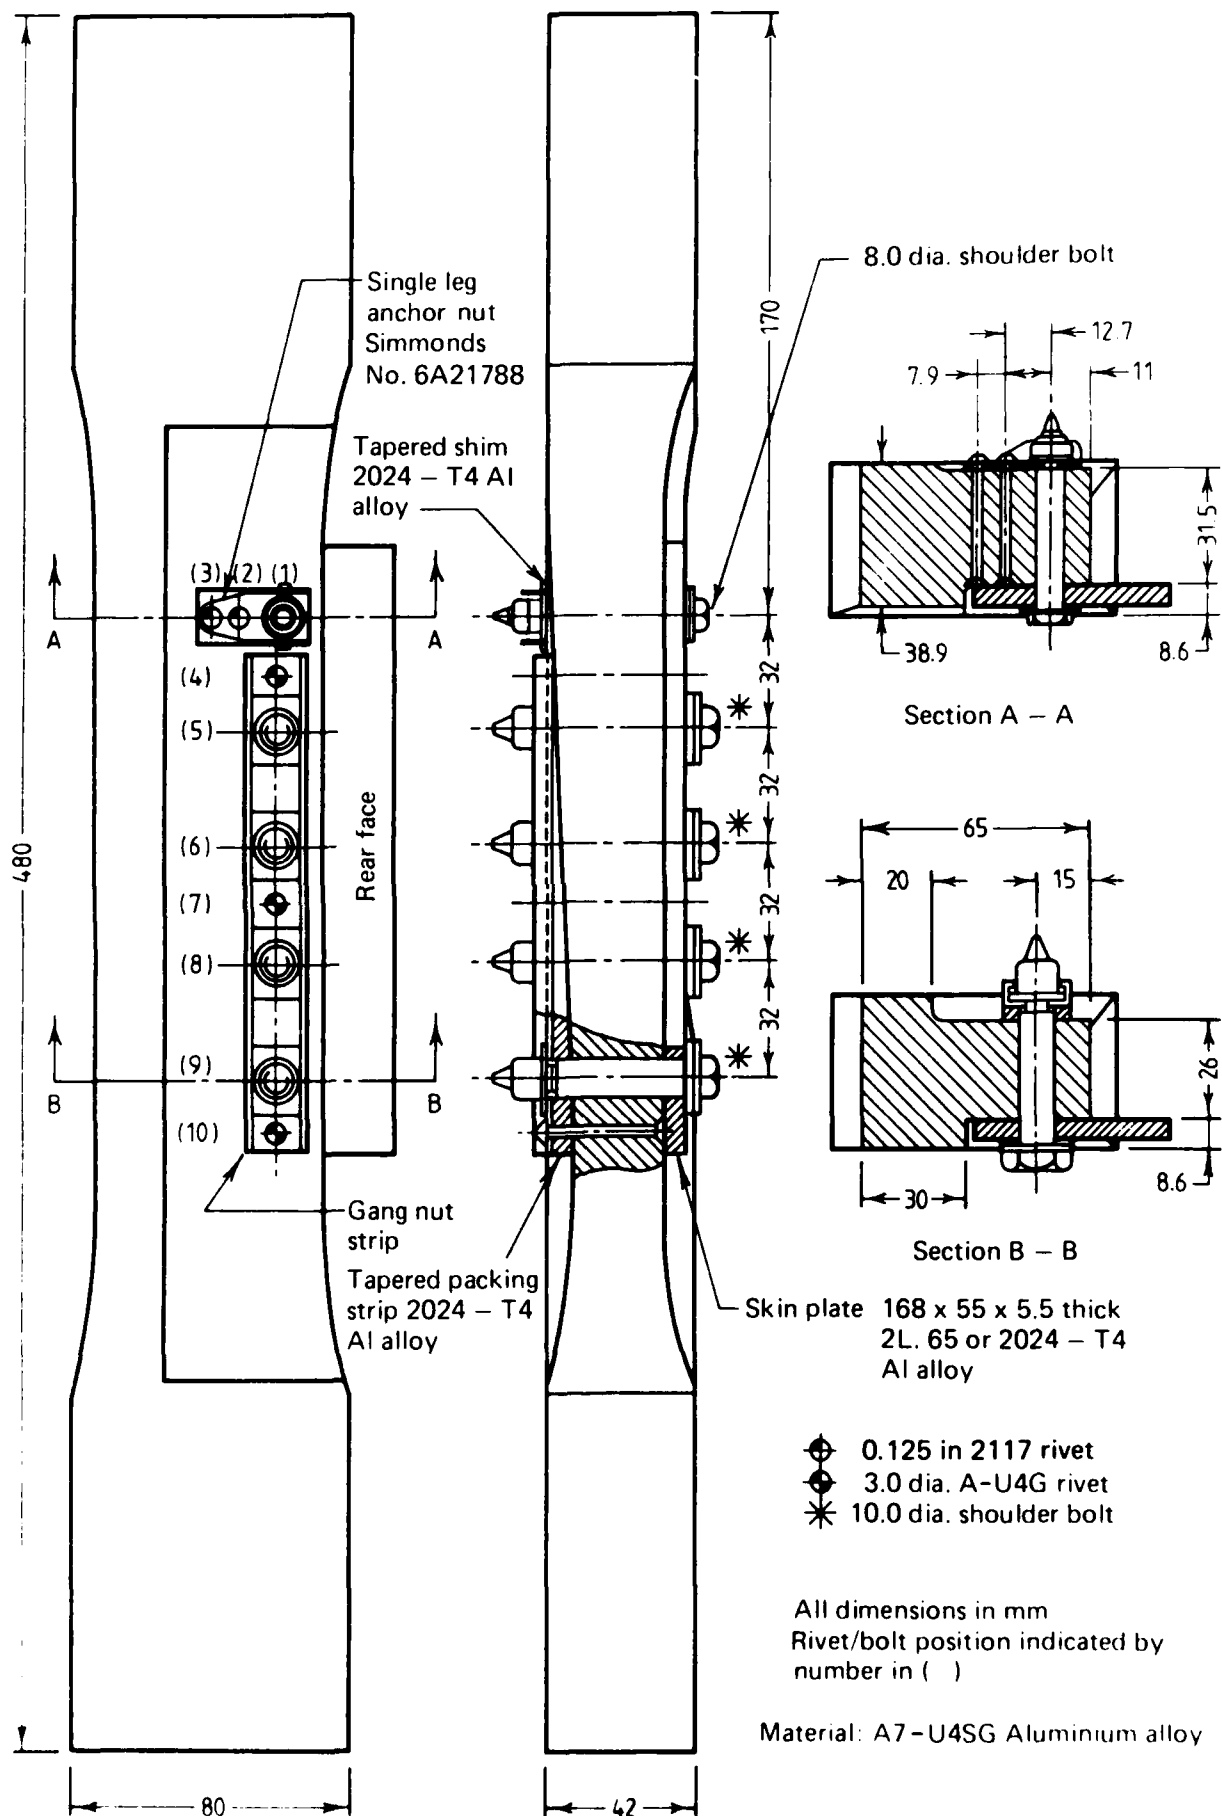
MIRAGE SPAR LOWER REAR FLANGE FATIGUE SPECIMEN
